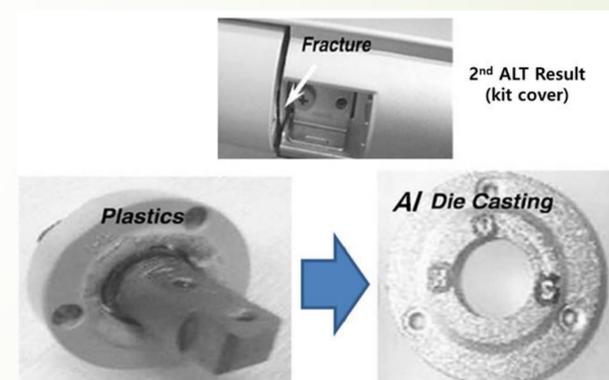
Fractured cover housing in 2nd ALT and its redesign
